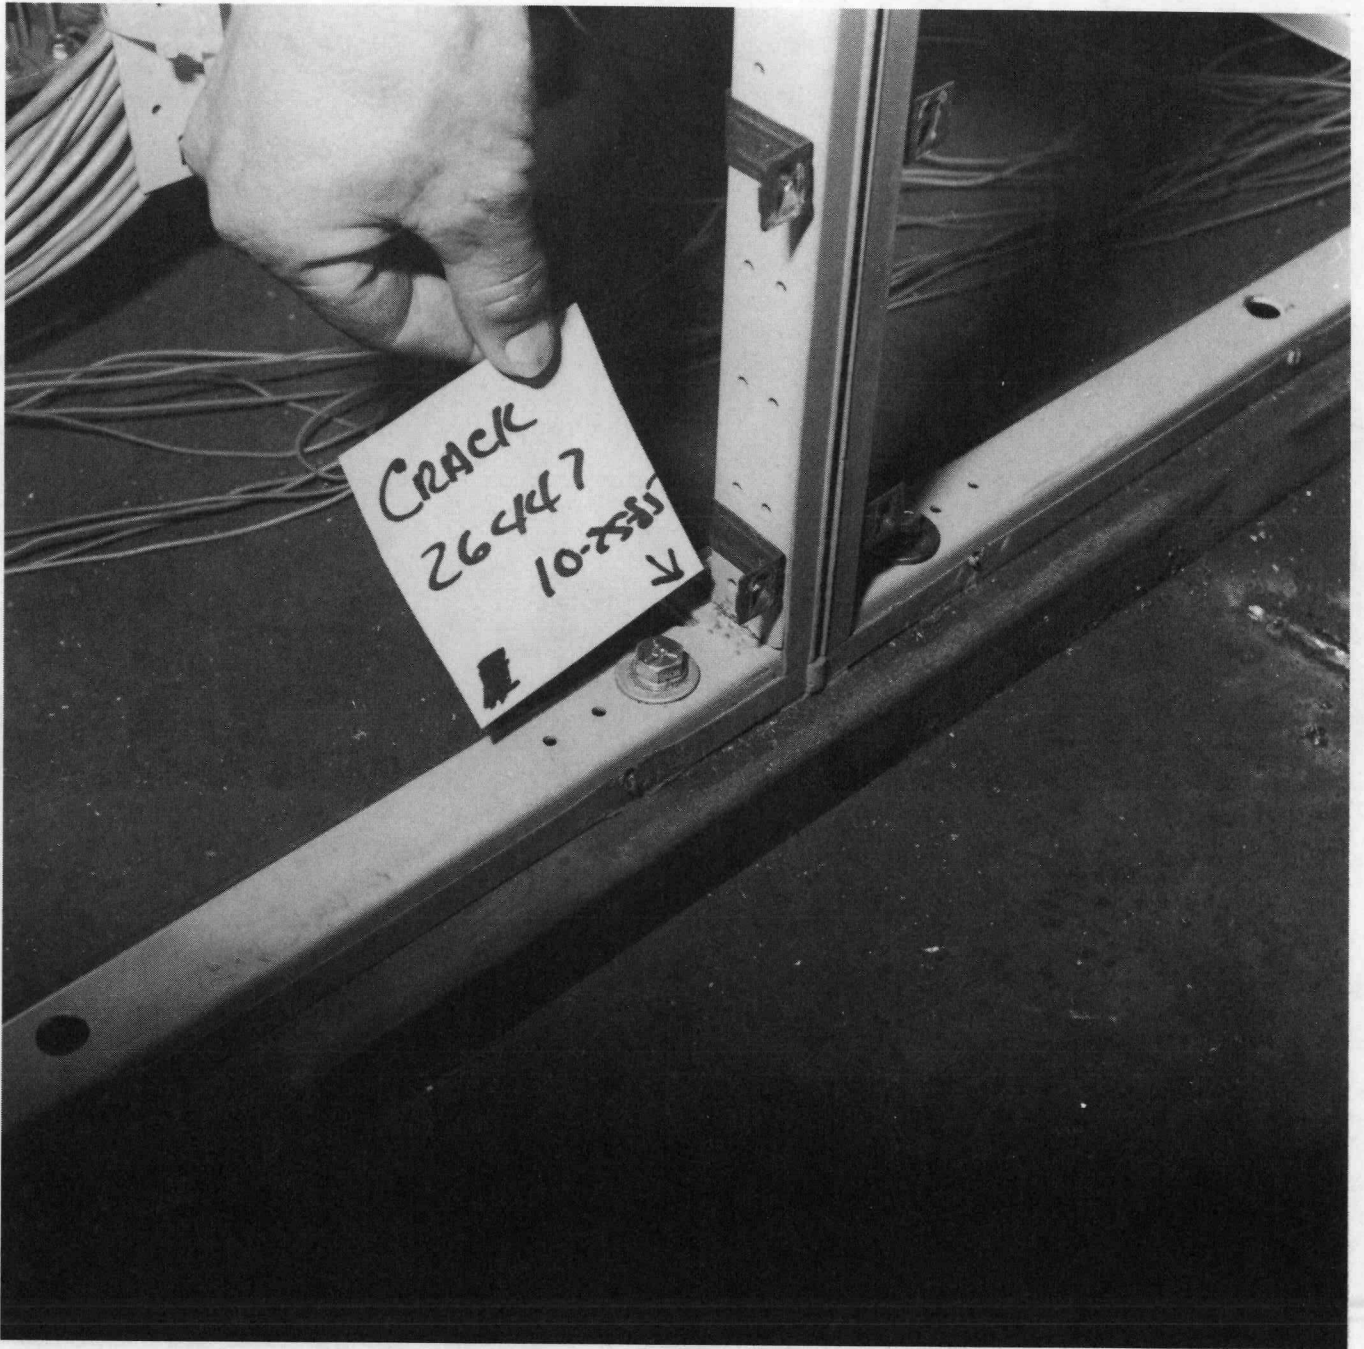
Details of cracked welds following Run 29 (1.6g table ZPA).
